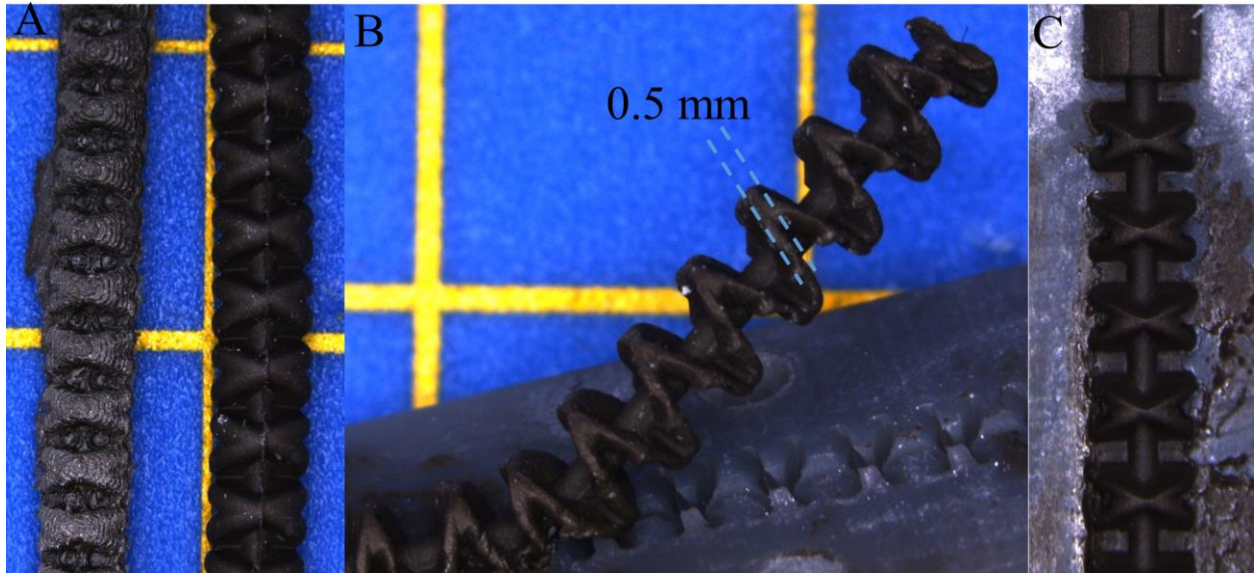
A. The difference between samples fabricated using FDM (Ultimaker S5) printed molds (left) vs using SLA printed parts (right). B and C. An example of molded double helix reinforced SMM using a mold printed with SLA printer (Form 3), showcasing detailed feature definition.
